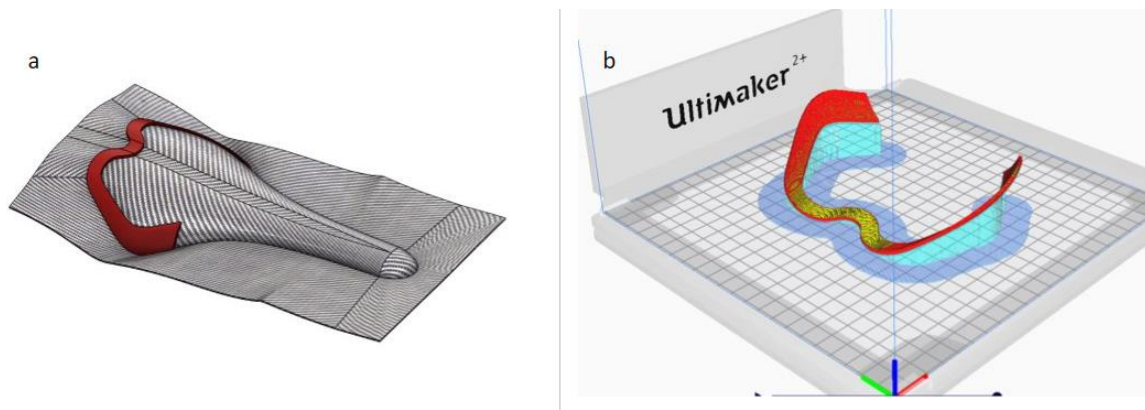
(a) Trim tooling design in CAD for infused saddle. (b) Trim tool slicer set-up in Cura.
